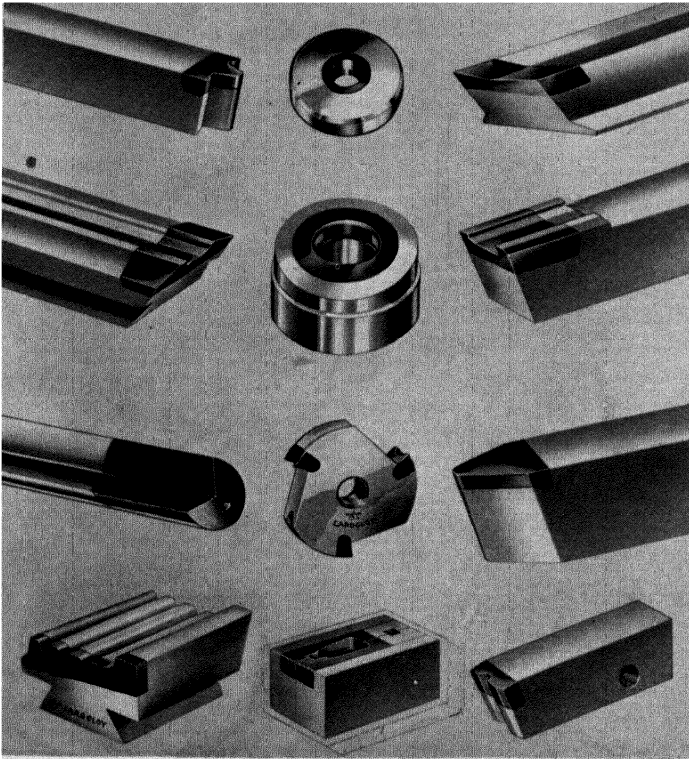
Assortment of special-shaped hard metal form tools and dies. They include a gun drill (third row, left), a cartridge case die (first row, center), a sheet metal drawing die (second row, center), and a sheet metal stamping die (bottom row, center). (Courtesy of Carboloy Co., Inc.)
